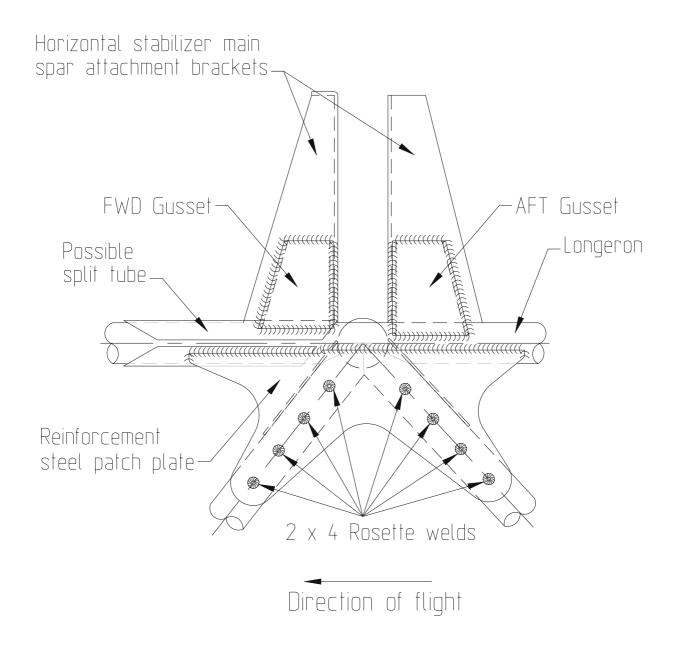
Typical installation of reinforcements in area around horizontal stabilizer main spar attachment brackets (view on left side).
